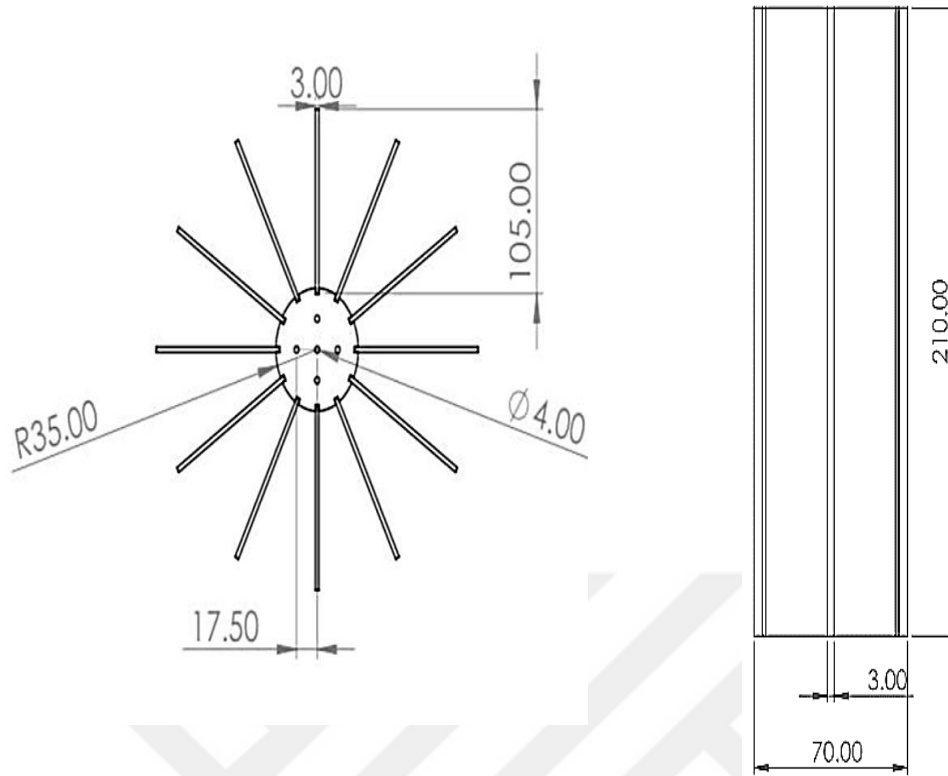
Cylinder base schematic illustration with dimensions specified in millimeters.
